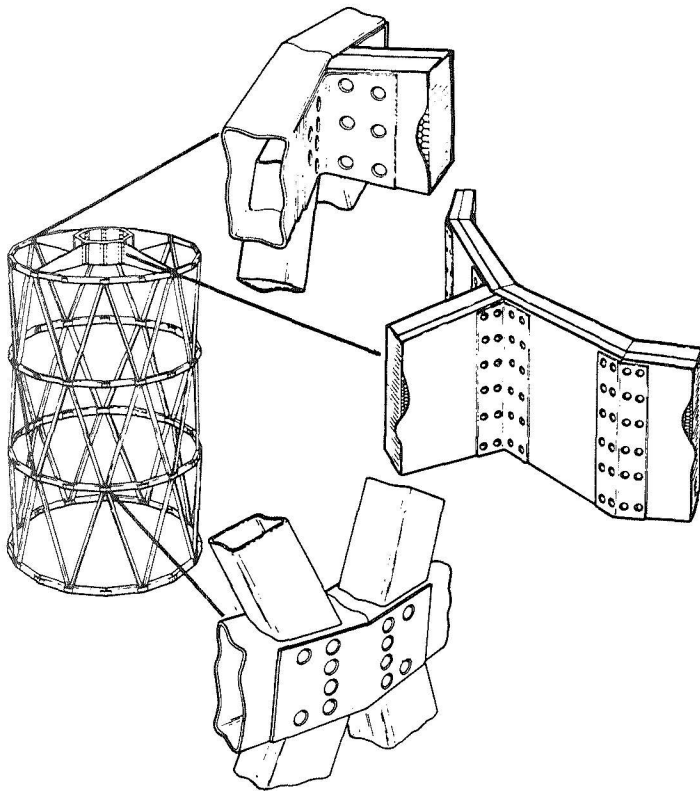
Low thermal distortion graphite epoxy metering truss concept.
